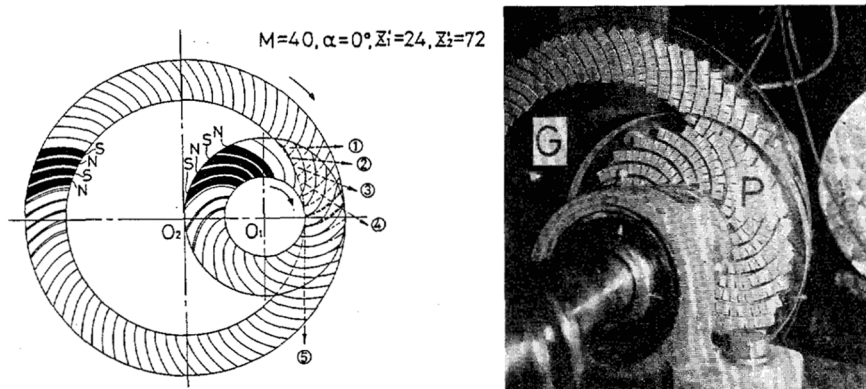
A new magnetic gear set (pinion and gear) using permanent magnets [6]
